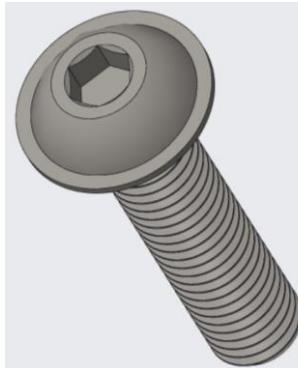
Model of M6x40 Button Head Flanged Hex Bolt in Creo
